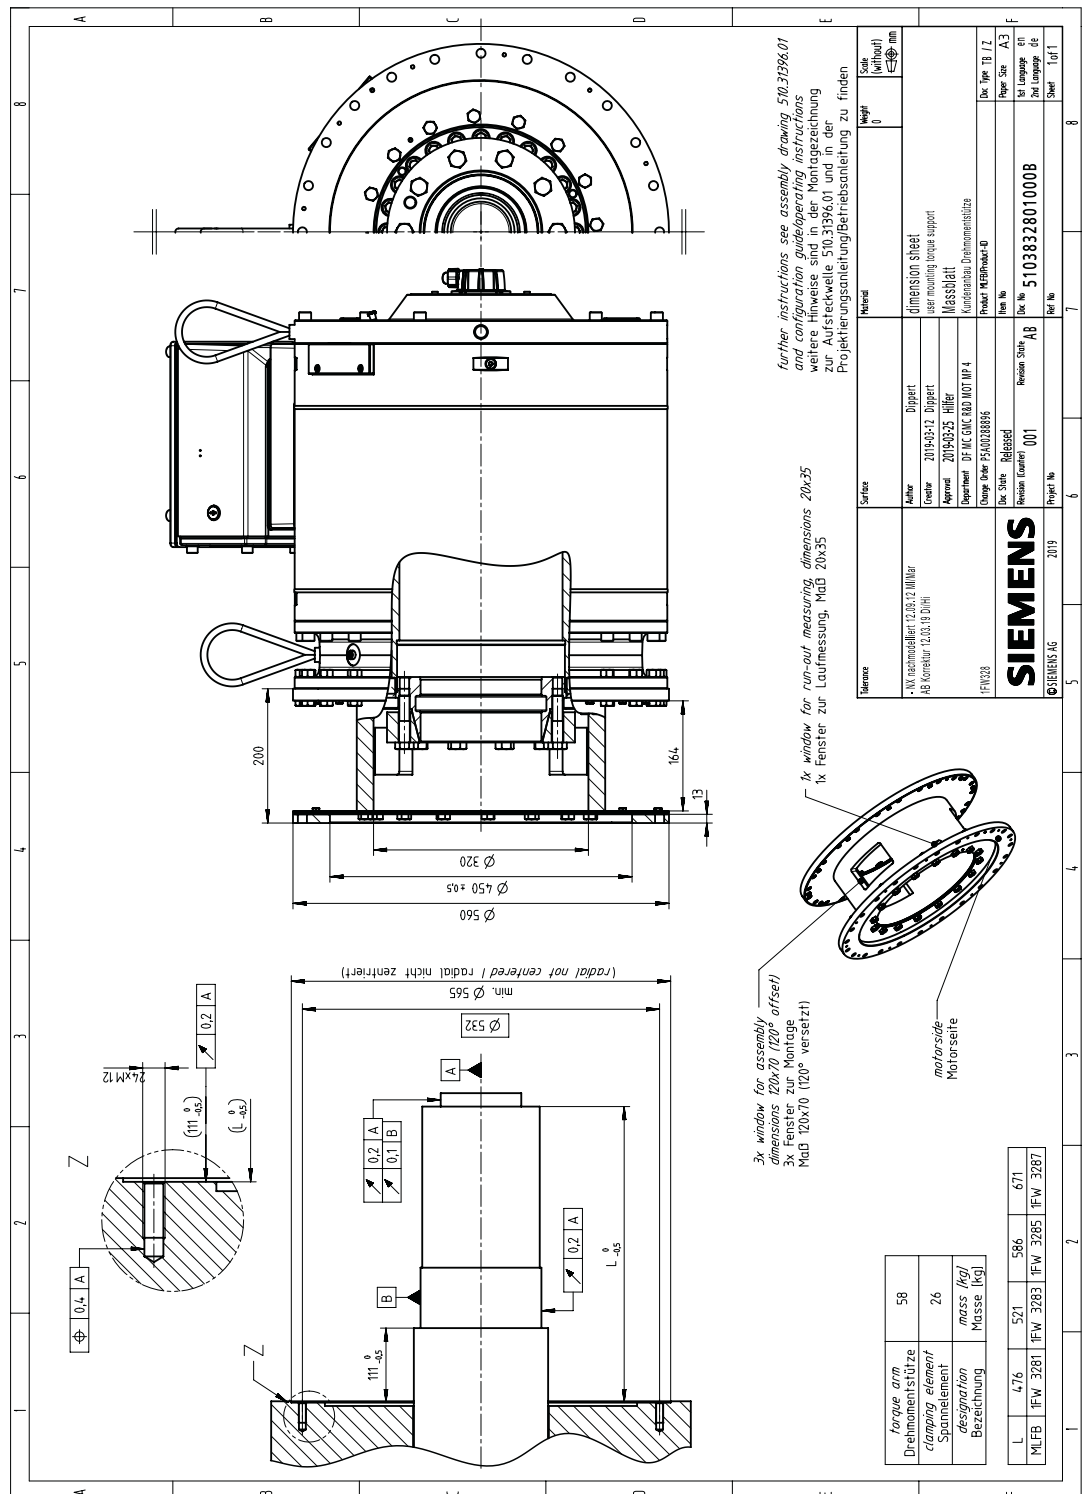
1FV328 Siemens torque arm, dimension drawing 510.38328.01
